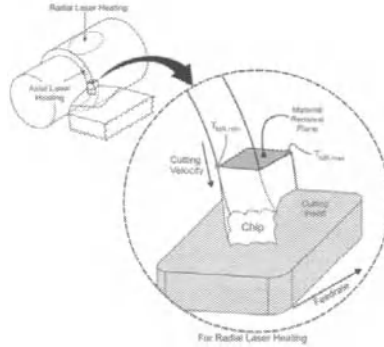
Laser assisted machining model illustrating the machining removal plane [11].
